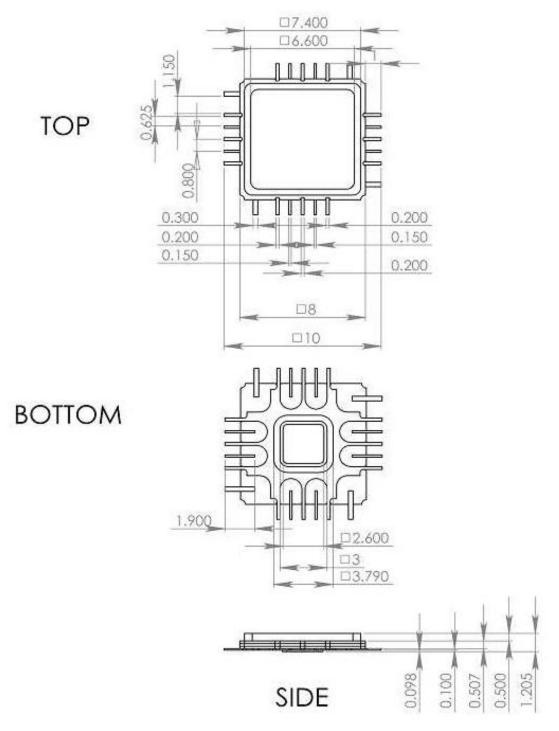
CQFP 24-Pin Package Drawing (All Dimensions in mm)
